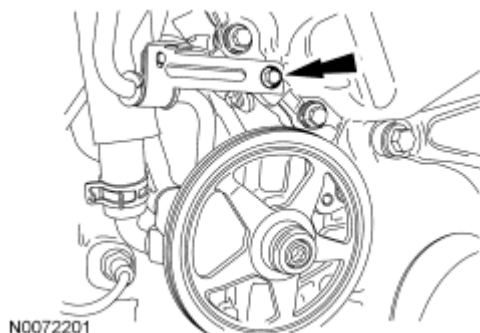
Identifying Bracket-To-Power Steering Pump Bolt
